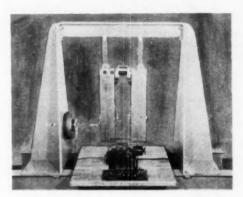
Early model of a fatigue machine used for testing crankshafts. With a small power output from an electromagnetic vibrator the crankshaft throw is set at or near resonance. (Chrysler Corporation.)
